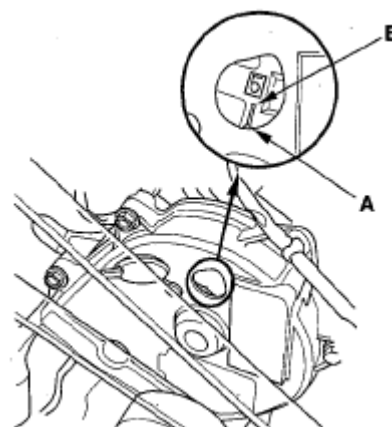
Identifying Pointer On Front Upper Cover With No. 5 Piston TDC Mark On Front Camshaft Pulley
